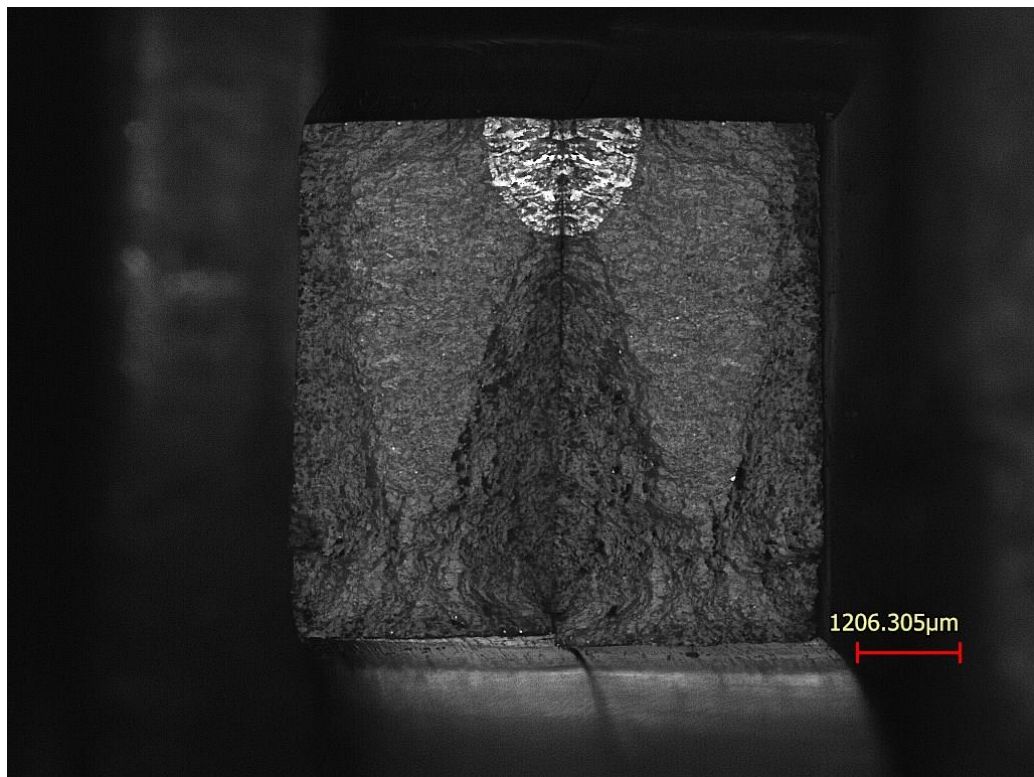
Specimen BS fracture surface (150,000 cycles : 80.43 ksi / 554.6 MPa)
